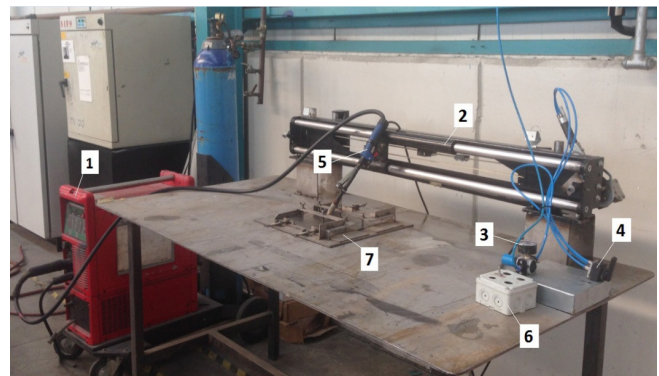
Components of the automated welding system used for experimental work: (1) Fronius Transpuls Synergic 2700 welding power supply, (2) Pneumatic welding automation mechanism, (3) Pneumatic valve to control welding speed, (4) Pneumatic valve to control welding start/stop and direction, (5) GMAW torch, (6) Welding arc start/stop control panel and (7) Welding fixture
